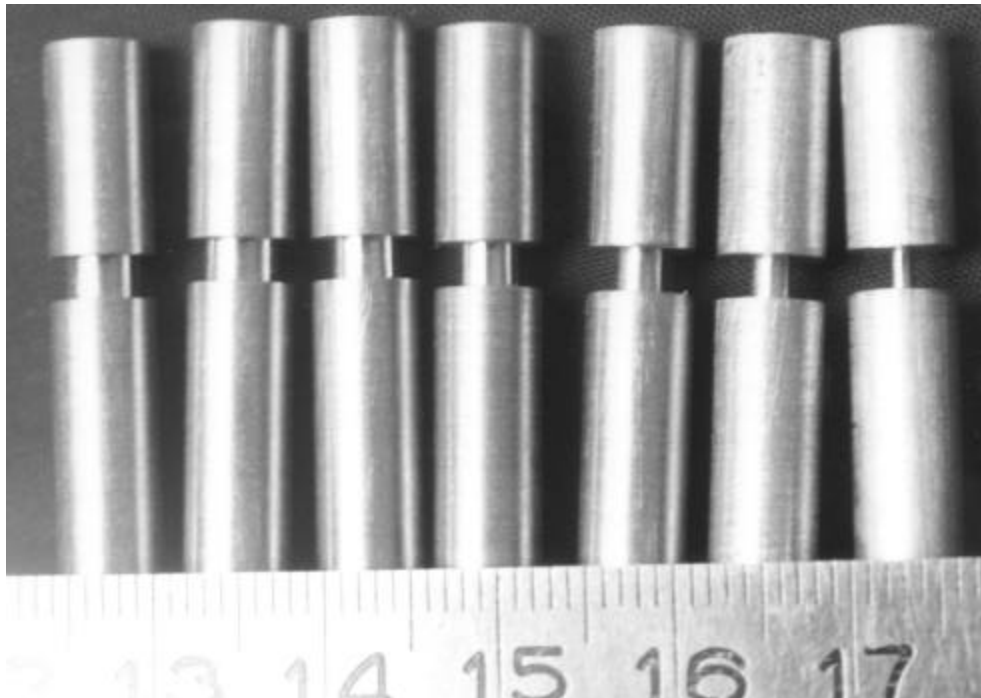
Photograph of aluminum constant diameter cylinder samples (ruler graduation in mm).
